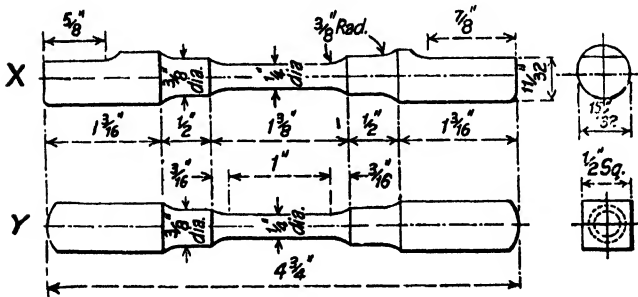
STANDARD TEST PIECES ADOPTED FOR USE WITH THE CARPENTER TORSION IMPACT TESTING MACHINE. AT X IS SHOWN THE FLATTENED END TYPE; Y SHOWS THE SQUARE END TYPE WITH ENDS ROUNDED
